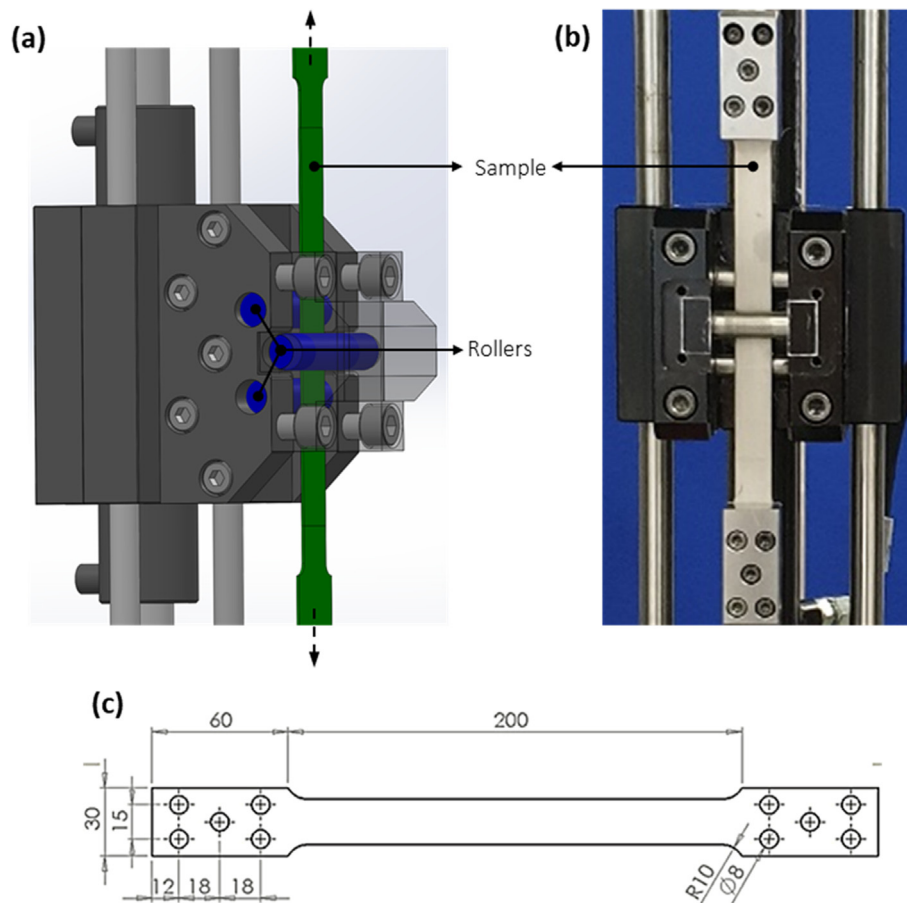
(a) CAD model of the R-BUT assembly, (b) a photograph illustrating the actual testing rig attached to a Zwick/Roell Z150 testing machine and (c) R-BUT testing sample. All dimensions are in mm.
